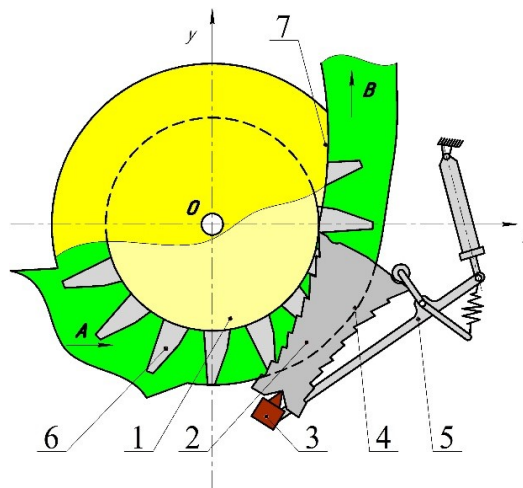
Scheme of a modern beater-knife cutting machine (cross-section): 1 – beater; 2 – knife; 3 – beam for installing knives; 4 – pallet; 5 – knife springing mechanism; 6 – beater finger; 7 – upper plate of the channel for movement of cut raw materials
